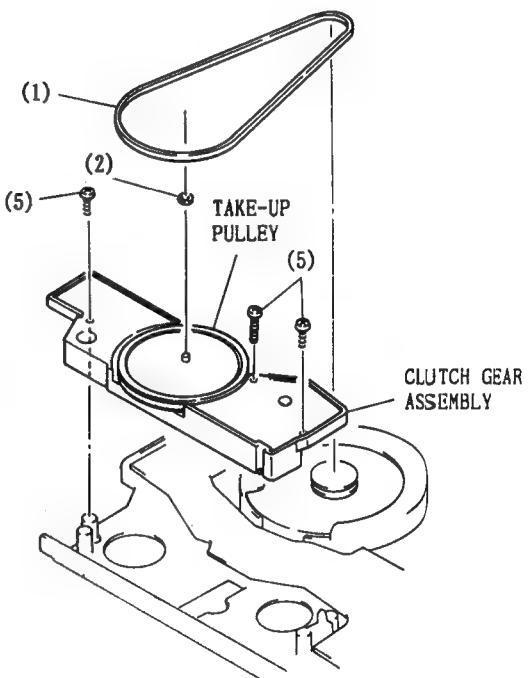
Take-up Pulley and Clutch Gear Assembly
